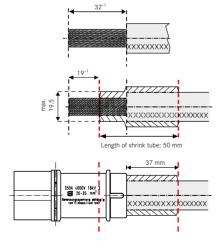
Shrink tube assembly over the cable for Han® HC Modular 350
